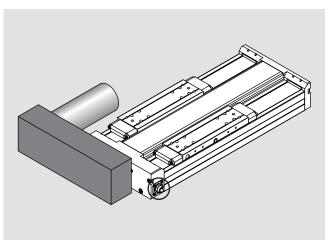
motor mounted direct on end plate (Mounting condition 53)
